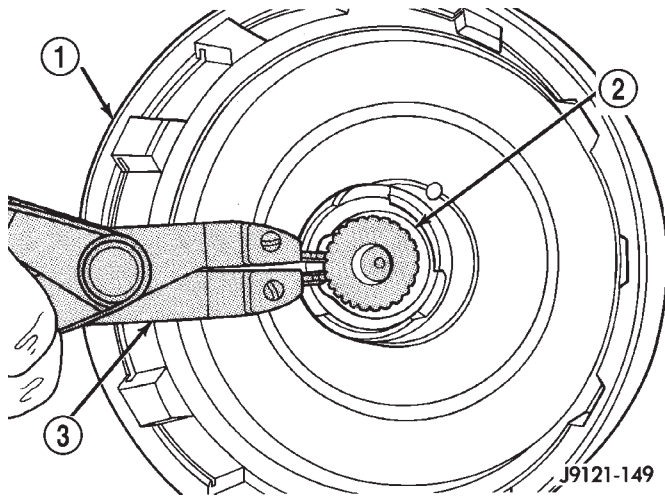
Removing/Installing Input Shaft Snap-Ring
